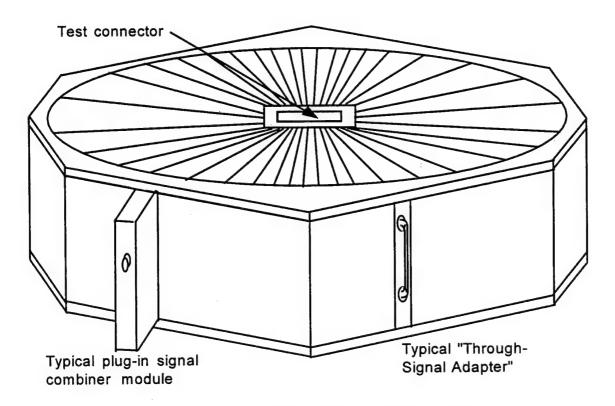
Test Fixture Concept - Cylindrical Fixture
